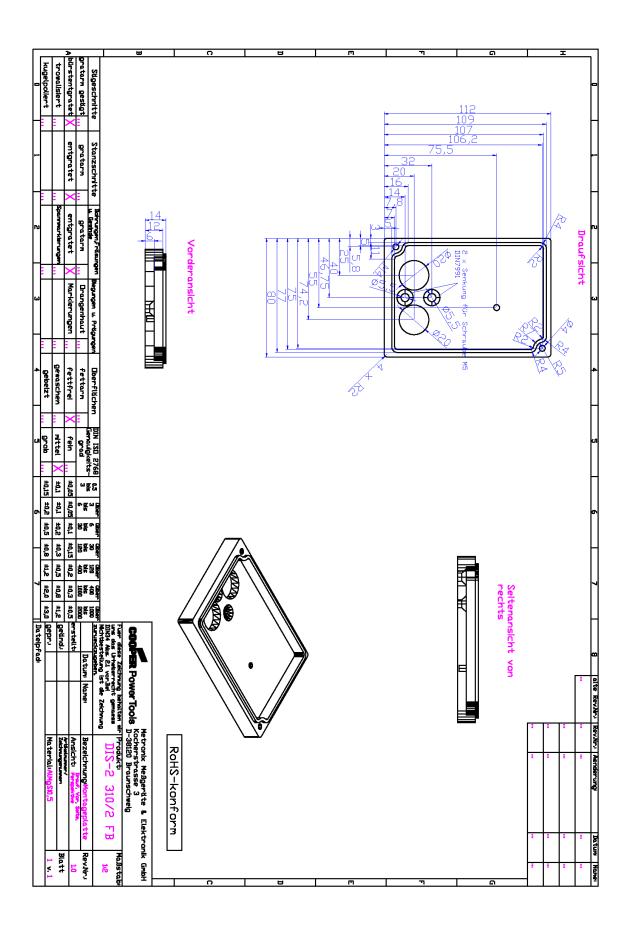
Example of a mounting plate for a motor from supplier *DRIVETEC
